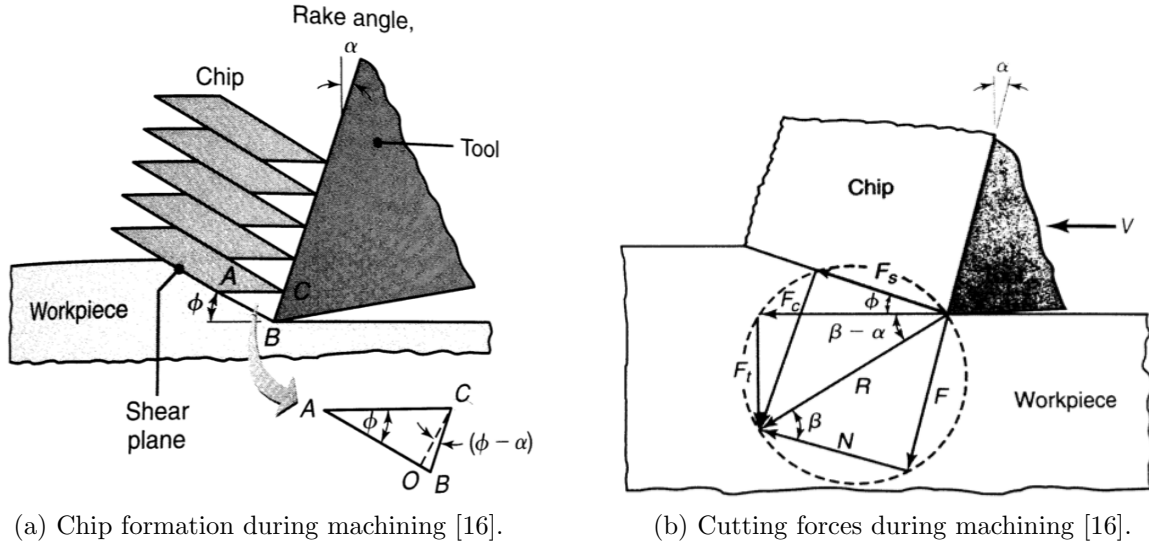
Chip formation and the relevant cutting forces during a machining operation.
